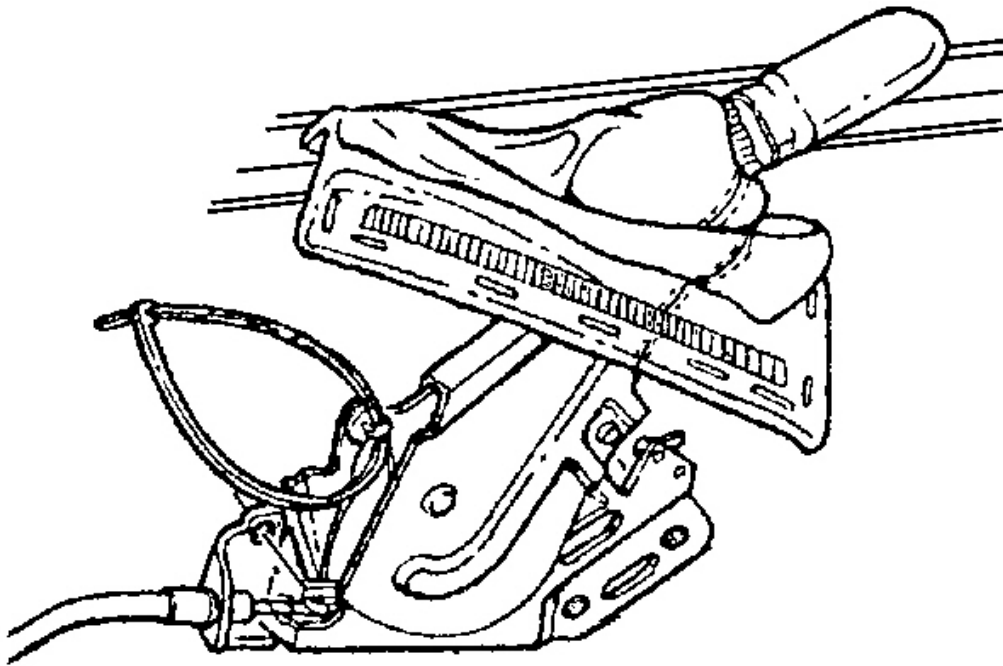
Park Brake Cable At Rivet To Park Brake Lever
